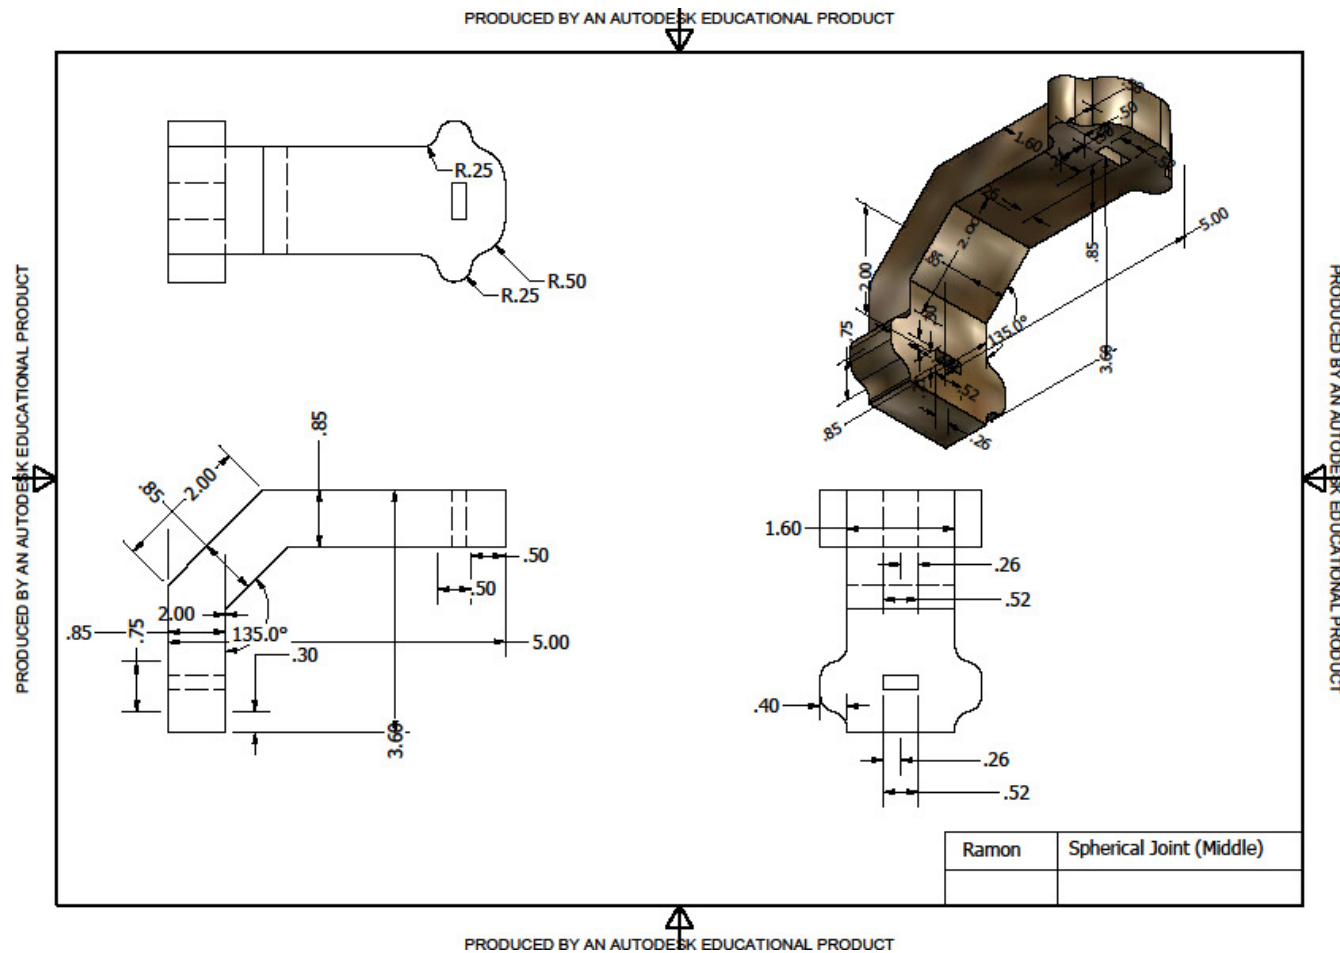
CAD drawing of the Spherical Joint (Middle) 6-DOF sensor.
